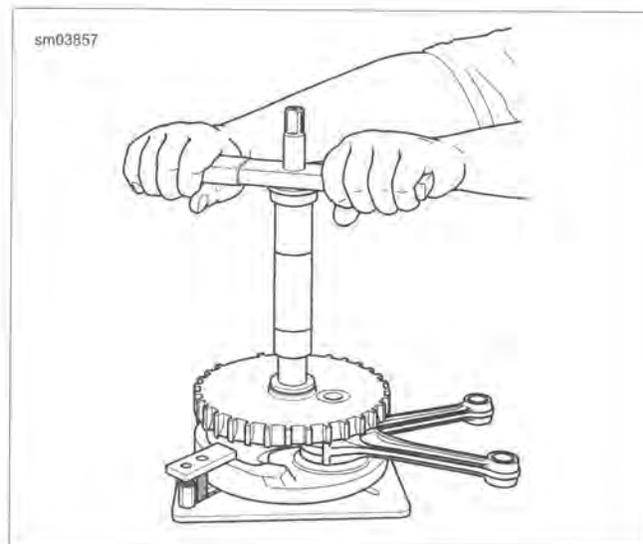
Press Inner Race onto Sprocket Shaft: Operation
